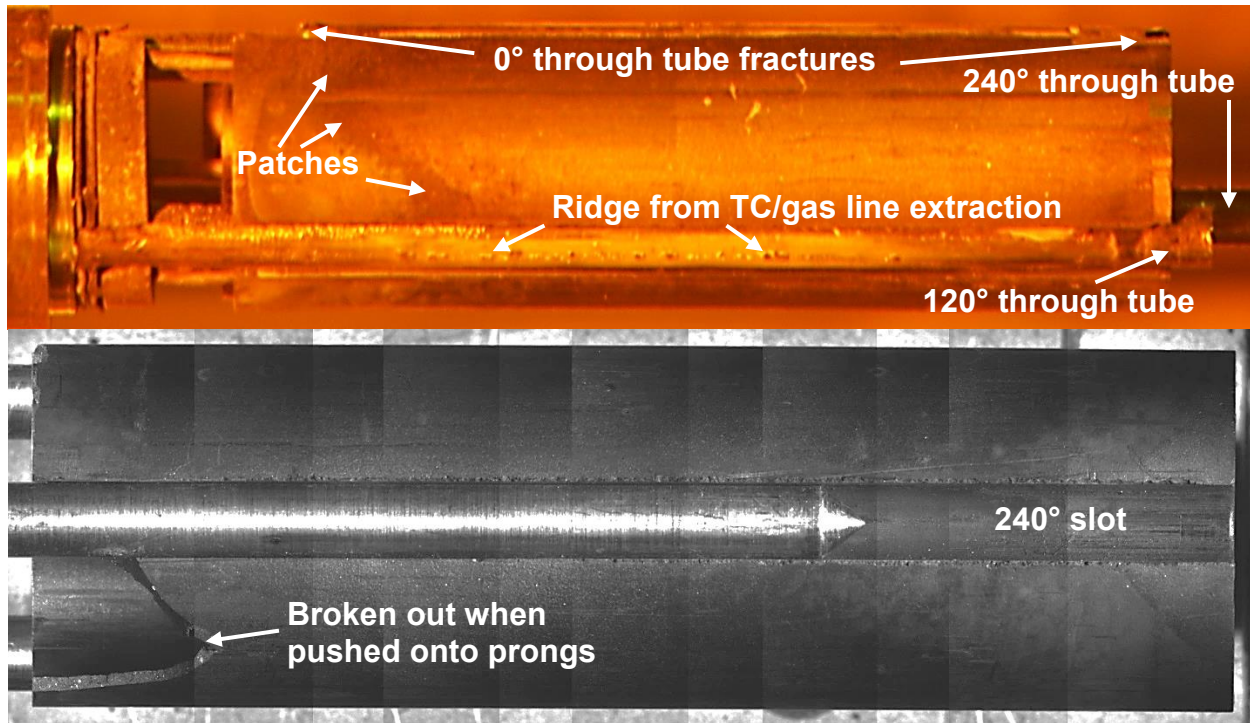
Two azimuths of Holder 6, bottom end to right (upper image) and bottom end to left (lower image).
